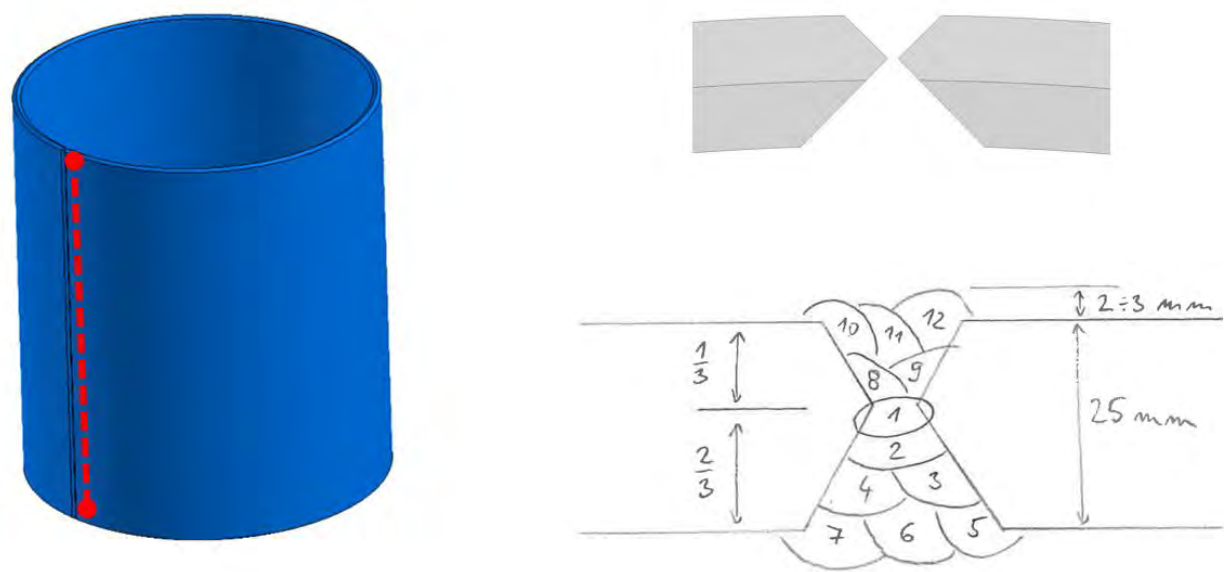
The weld for connecting edges of the inner cylindrical shell after roll bending, the corresponding bevel shape and layout of weld passes
